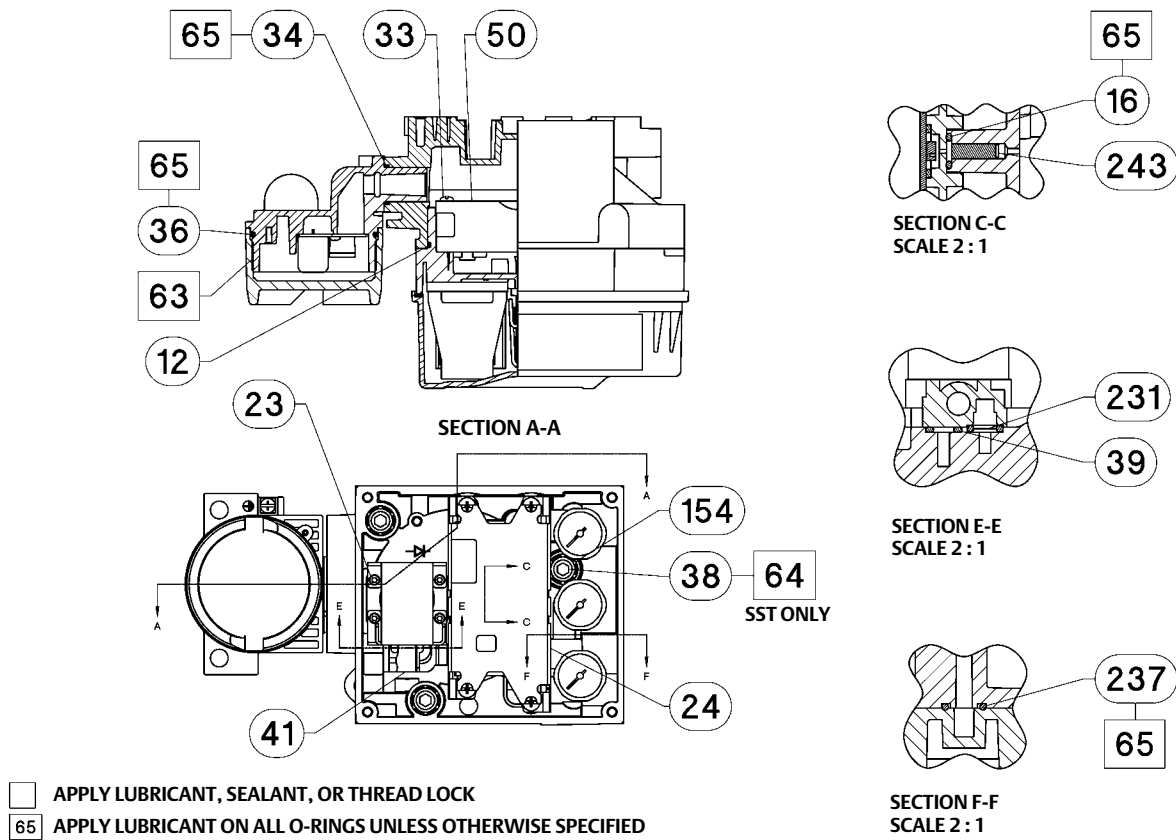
FIELDVUE DVC6200p Digital Valve Controller Housing Assembly
